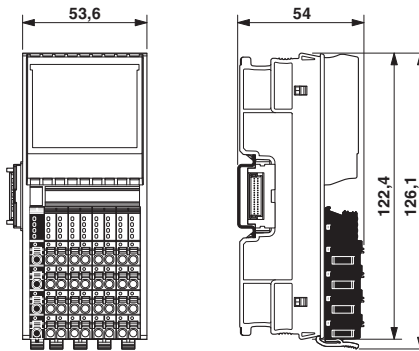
Nominal dimensions of the F housing with one terminal field (type 1F, e.g., AXL F AI8 XC 2H, AXL F DI32/1 2H)
